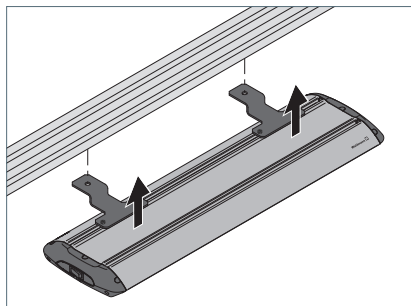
Mounting the luminaire of mounting type "Top, fixed", 2nd option.
